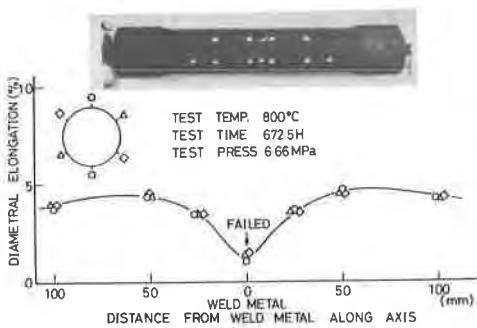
Expansion of the welded cylinder after creep testing with internal pressure loading.
